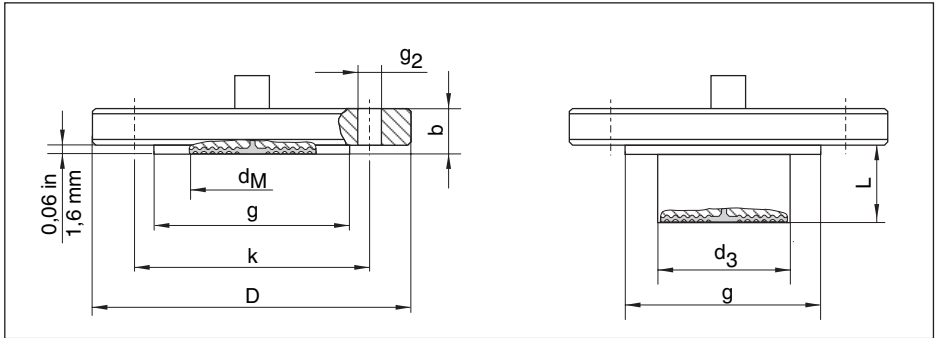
Chemical seal with ASME flanges, dimensions according to B16.5, seal ledge RF
